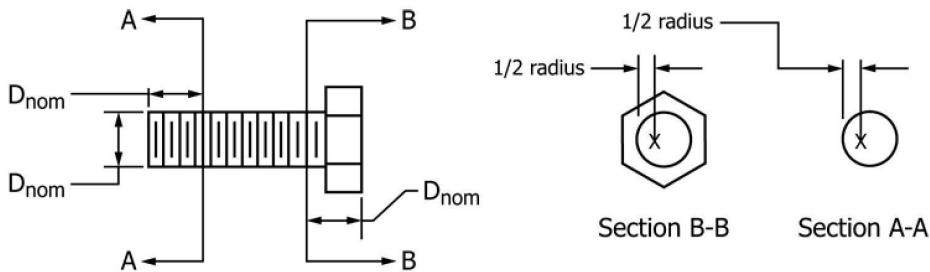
Location of Standard Round 2-in. Gauge Length Tension Test Specimen When Turned from Large Size Bolt
